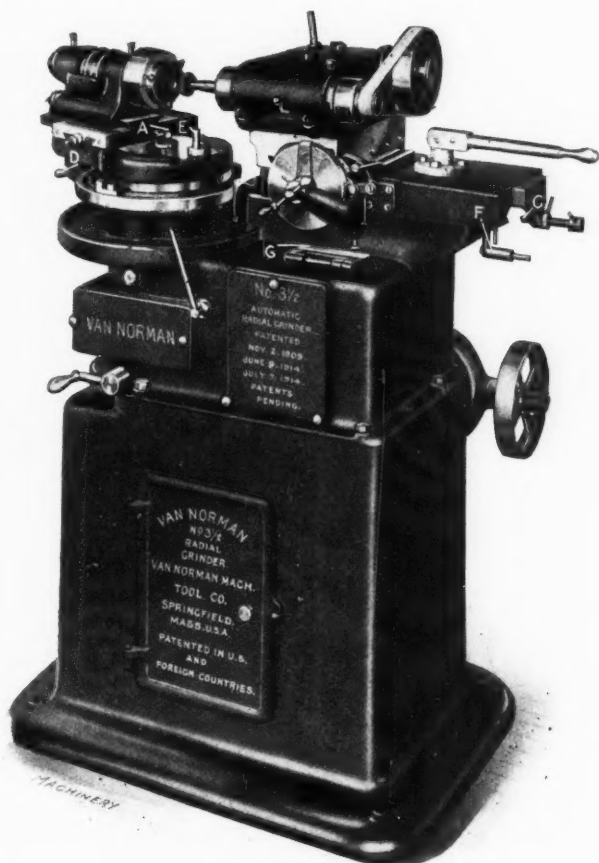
Van Norman No. 3½ Automatic Radial Grinder for grinding Single-row Ball Bearings
